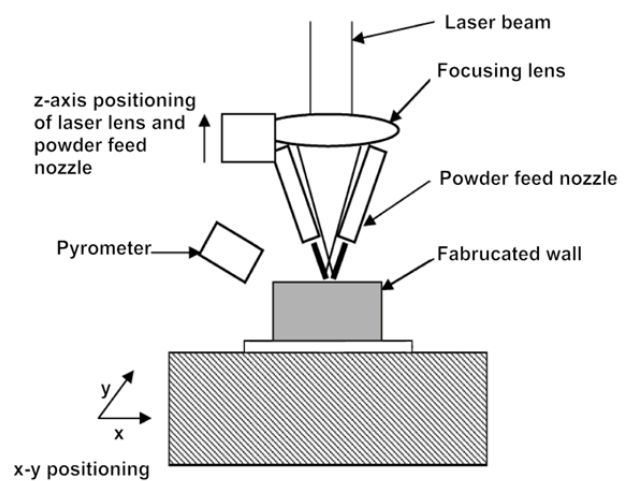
Schematic presentation of the most important components on the laser head of LENS technology machine
